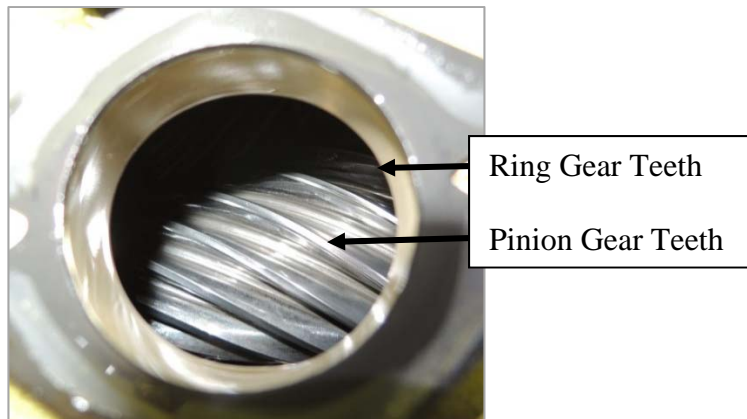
Main Rotor Transmission As Viewed Through the Inspection Port
